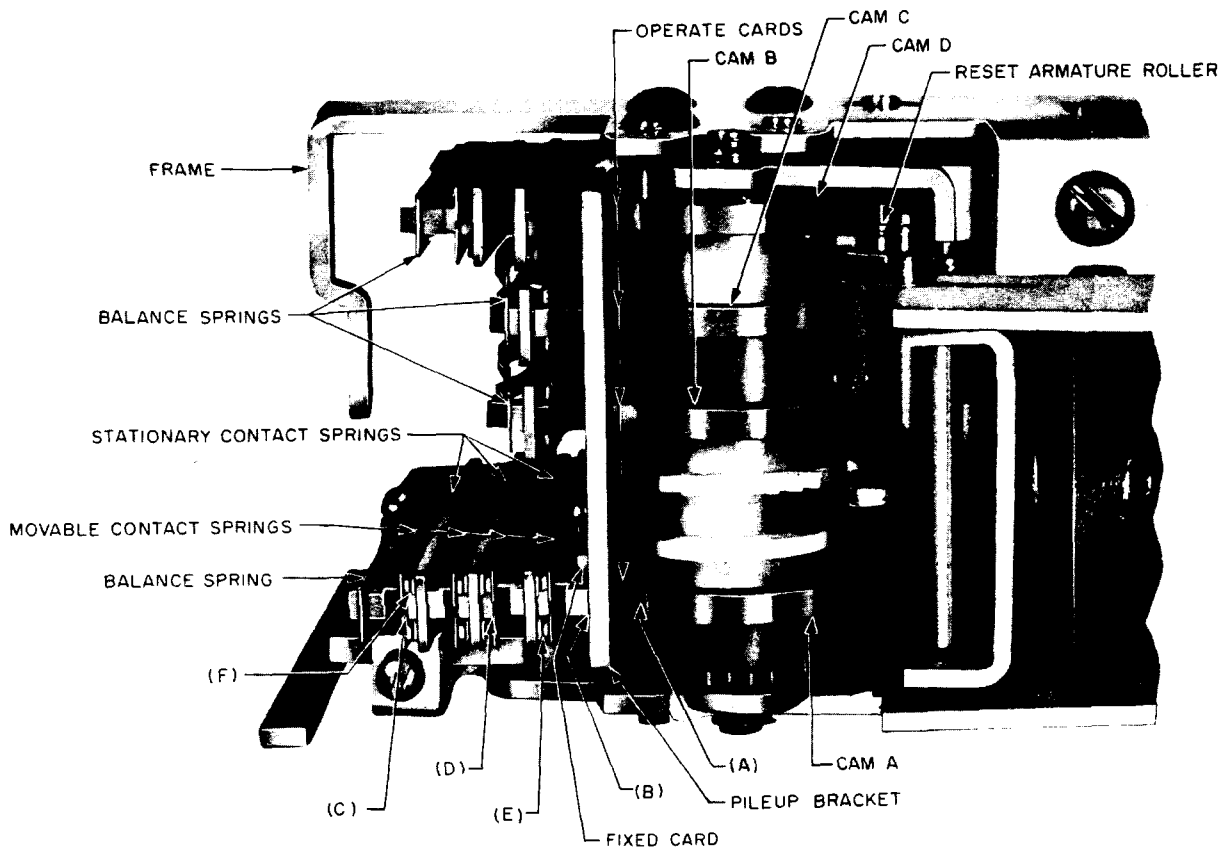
Partial Right Side View of 3-Type Counter (cover removed)
